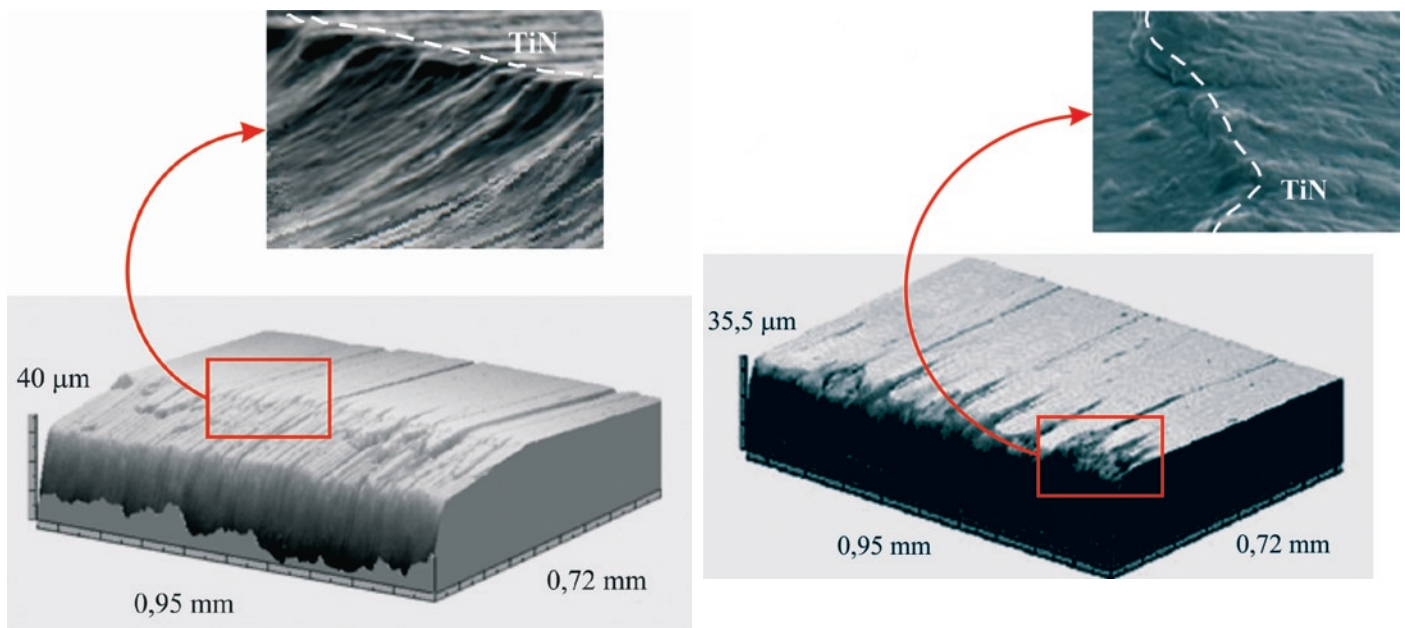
M2+TiN punch flank surface after 800 000 cuts with blanking clearance: a) 0%, b) 8%
